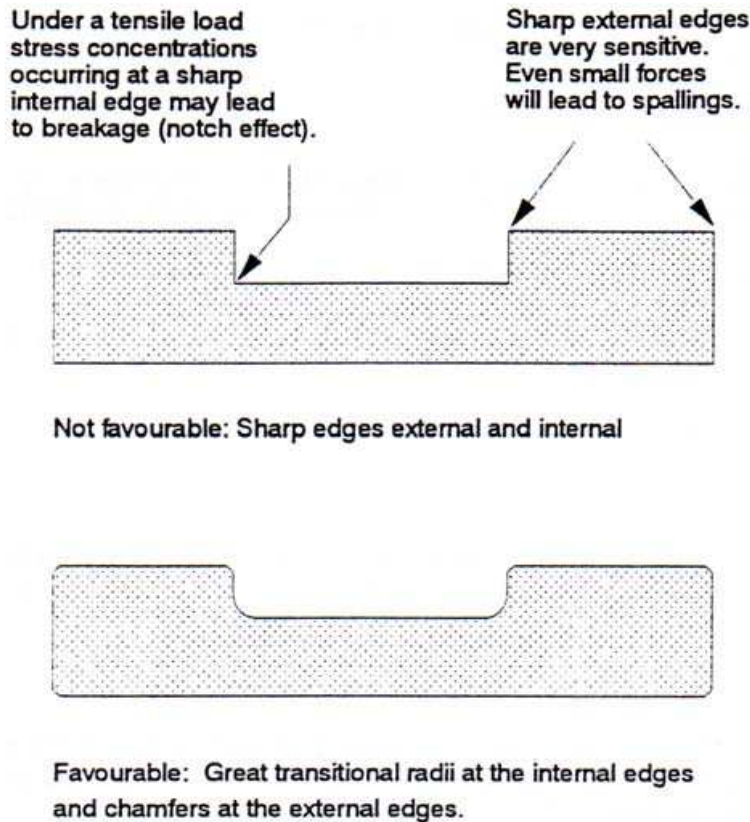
Favorable edge design of SUPERTEST ZD® parts.
